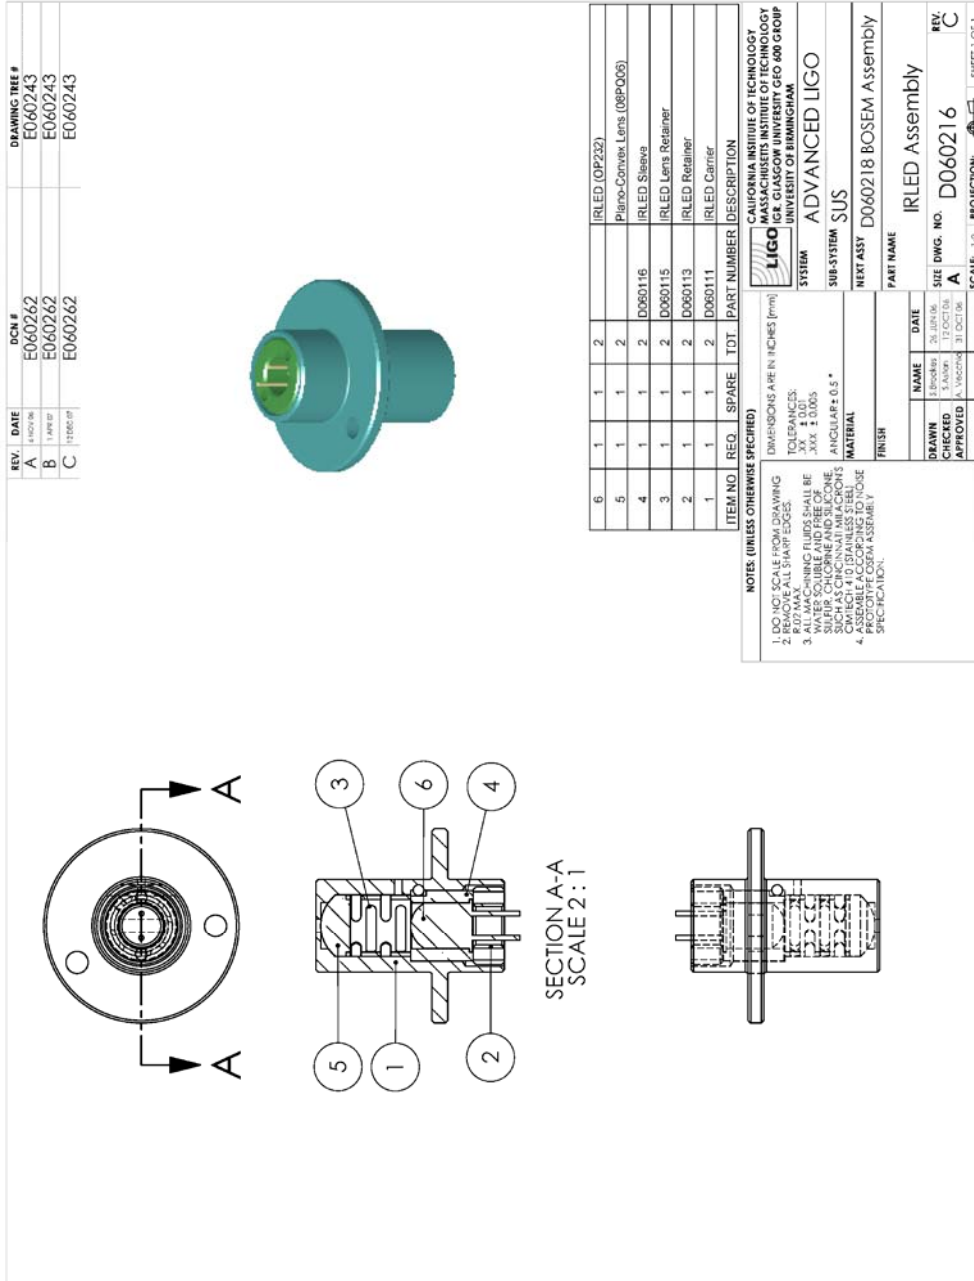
BOSEM IRLED carrier assembly (D060216).
